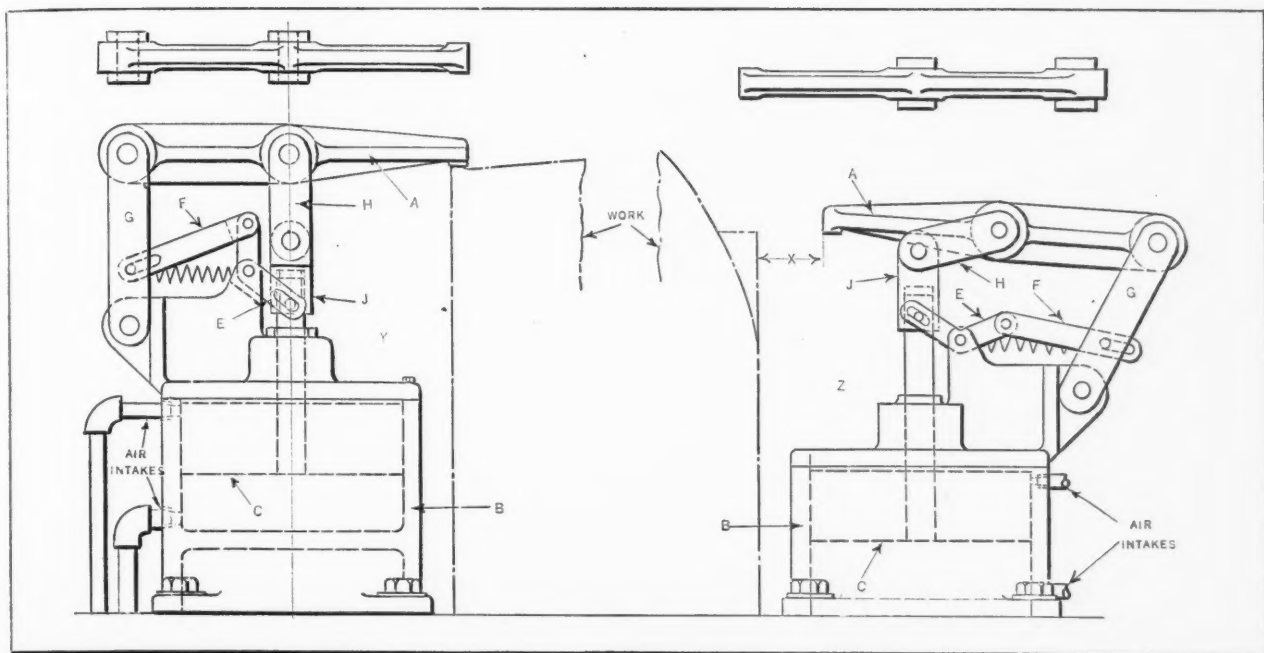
Air-operated Clamps Used for Holding Heavy Castings on the Table of a Drilling and Tapping Machine
